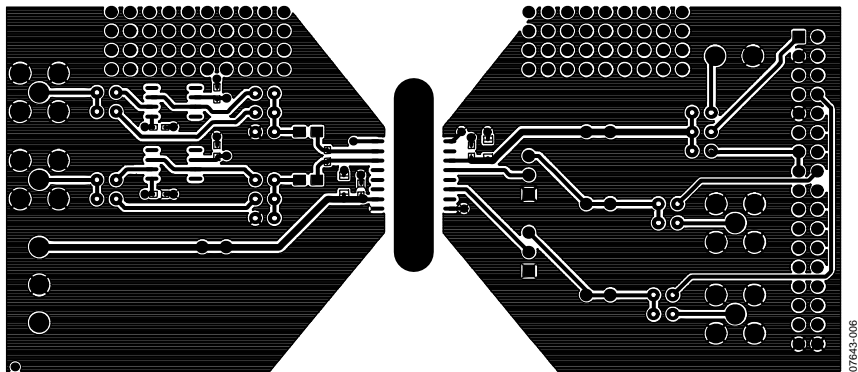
Component Side Artwork for the EVAL-AD7401A, 16-Lead SOIC Package
